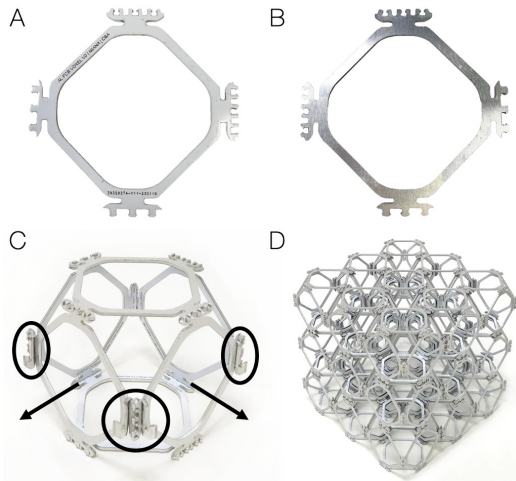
The construction voxel system. A) A single aluminum PCB voxel face from the top view. B) The bottom view of the same voxel face. C) A voxel with the lateral connection clips highlighted and the assembly direction demarcated. D) A 3x3x3 assembly of voxels for characterizing the behavior of the bulk material.
